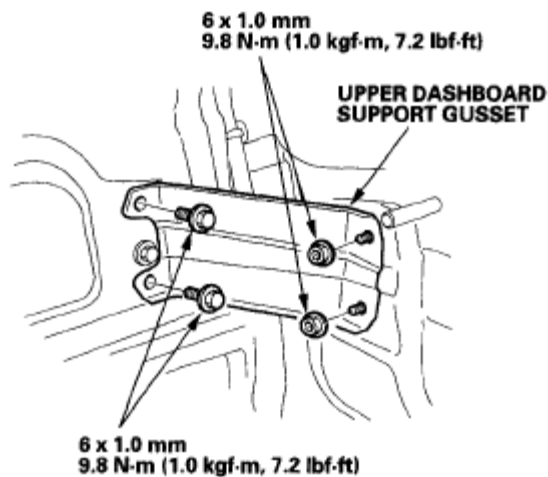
Identifying Upper Dashboard Support Gusset Components (With Torque Specifications)
